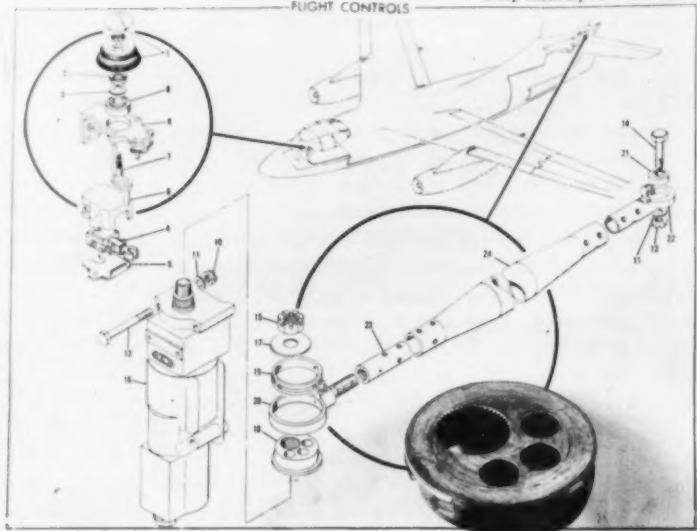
Comparison of photo of cam superimposed upon IPB diagram shows the cam, item 18, incorrectly drawn—note counterbalancing holes and flange positions.
